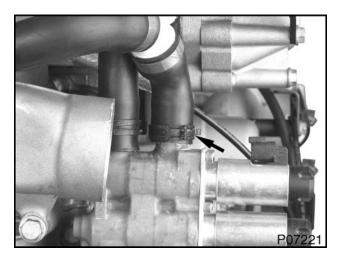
Charge Air Cooler (CAC) supply coolant pipe
